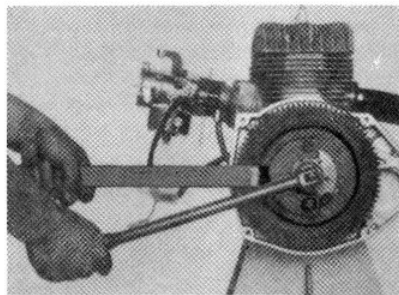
Using the flywheel holding tool to remove crankshaft nut.
